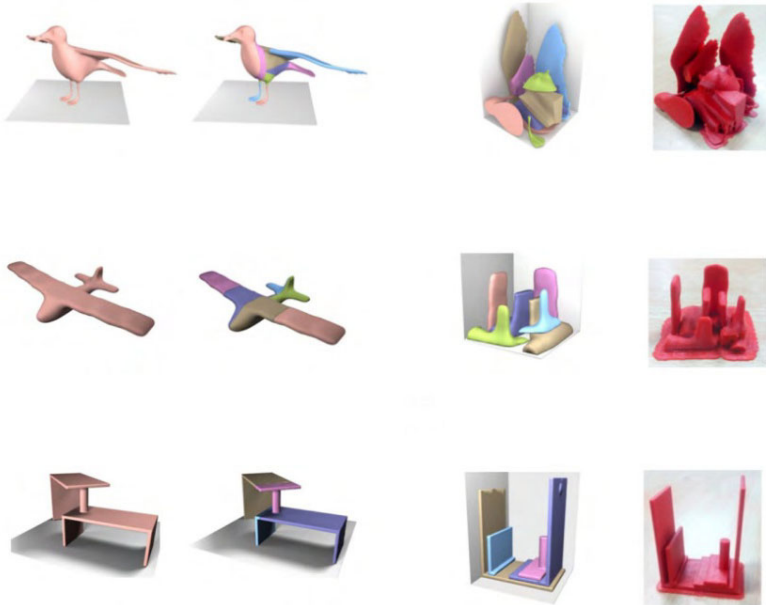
the printed outcomes by using Geng Guohua, et al. [3].
